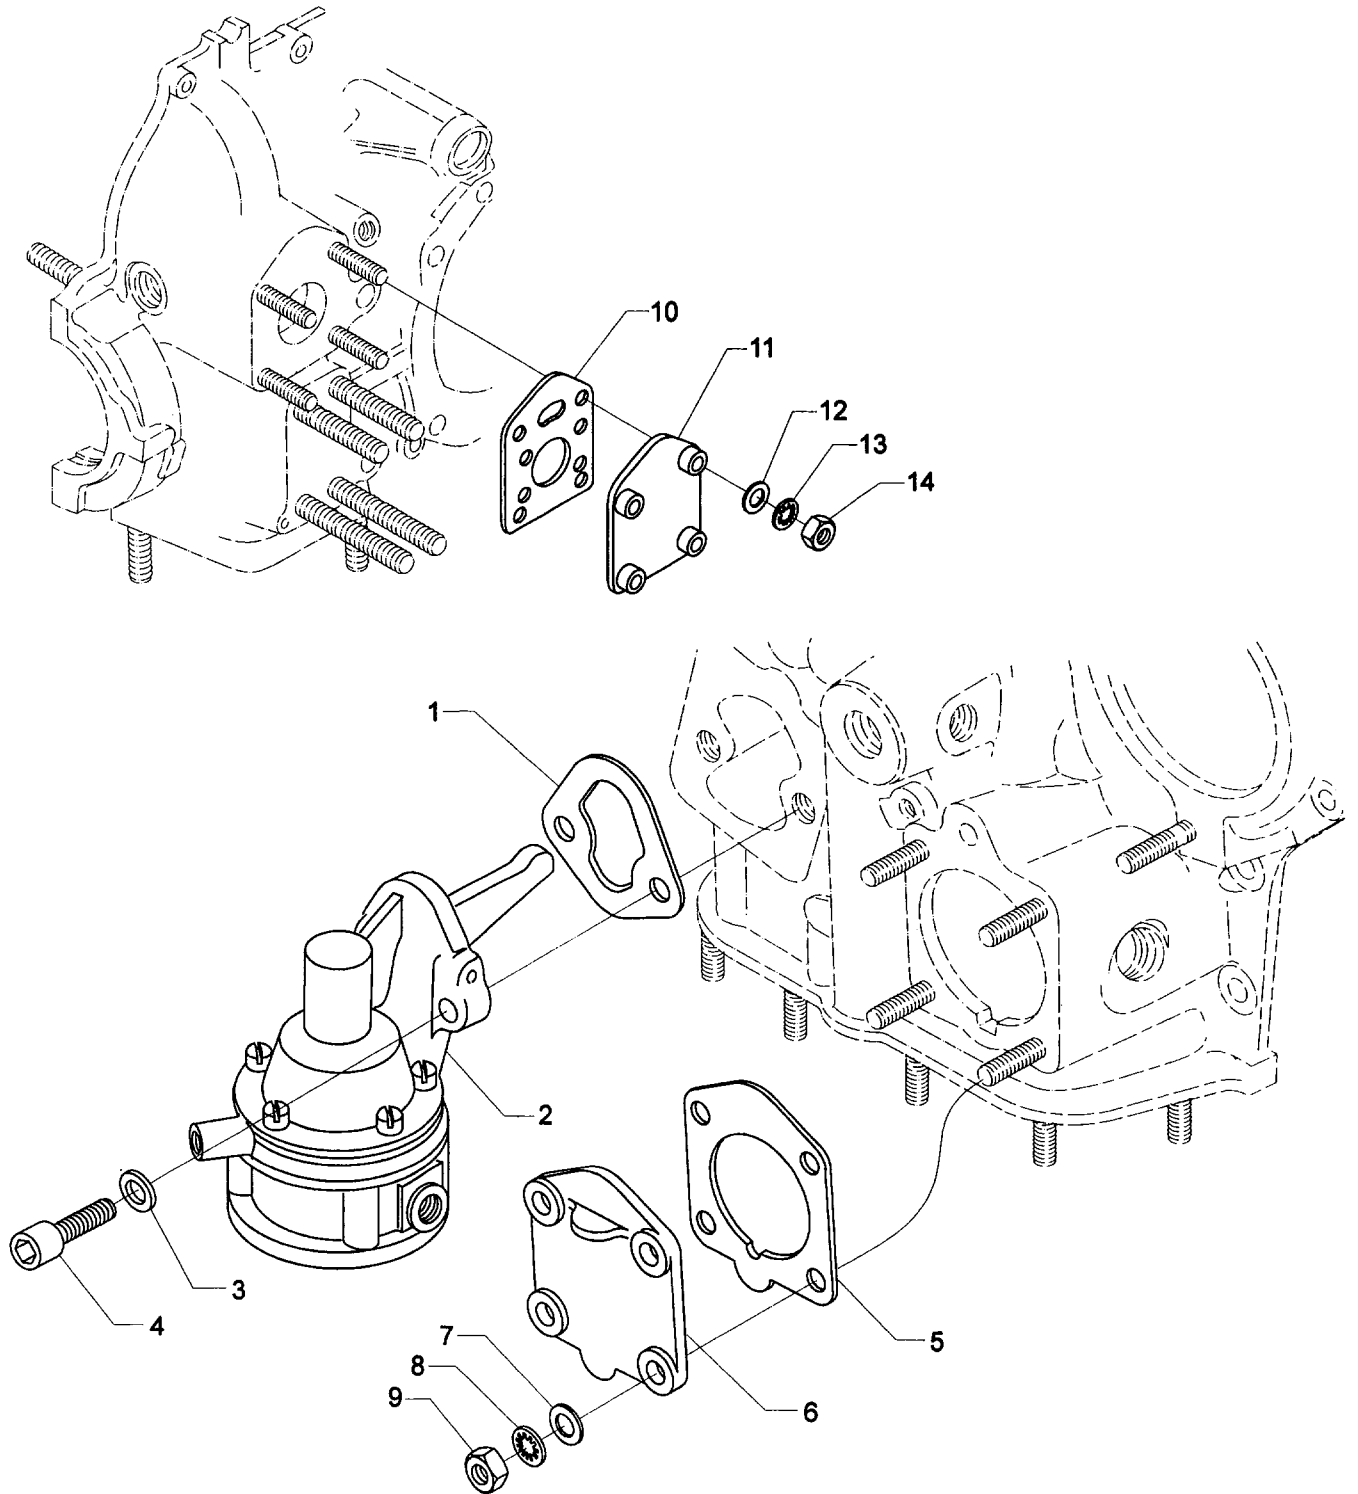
FUEL PUMP AND PROPELLER GOVERNOR DRIVE COVER
